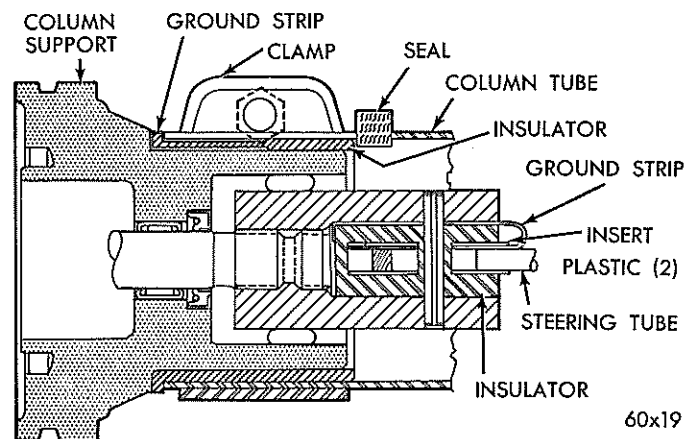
Jacket Tube Support and Steering Column Tube (Cross Section)
